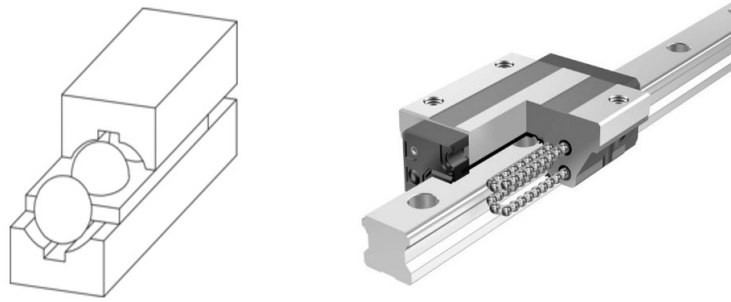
Example of Linear Bearings, Fixed (Left) and Recirculating (Right) Configurations [17]
